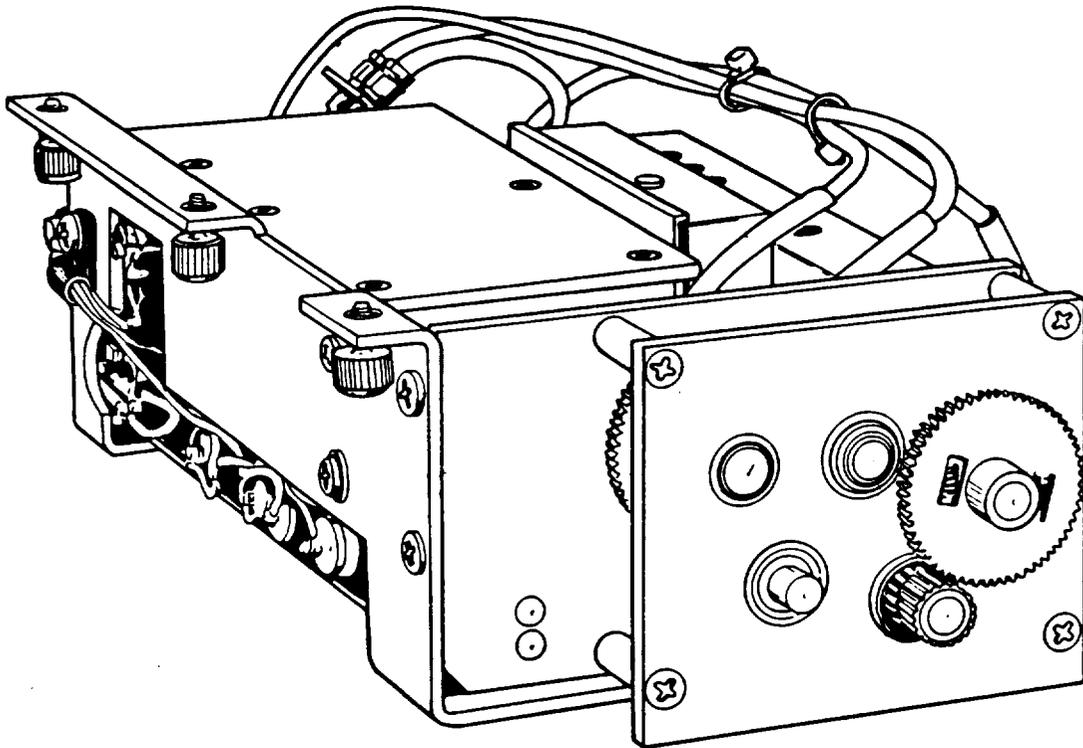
WJ-9124 250-500 MHz Tuner Assembly
